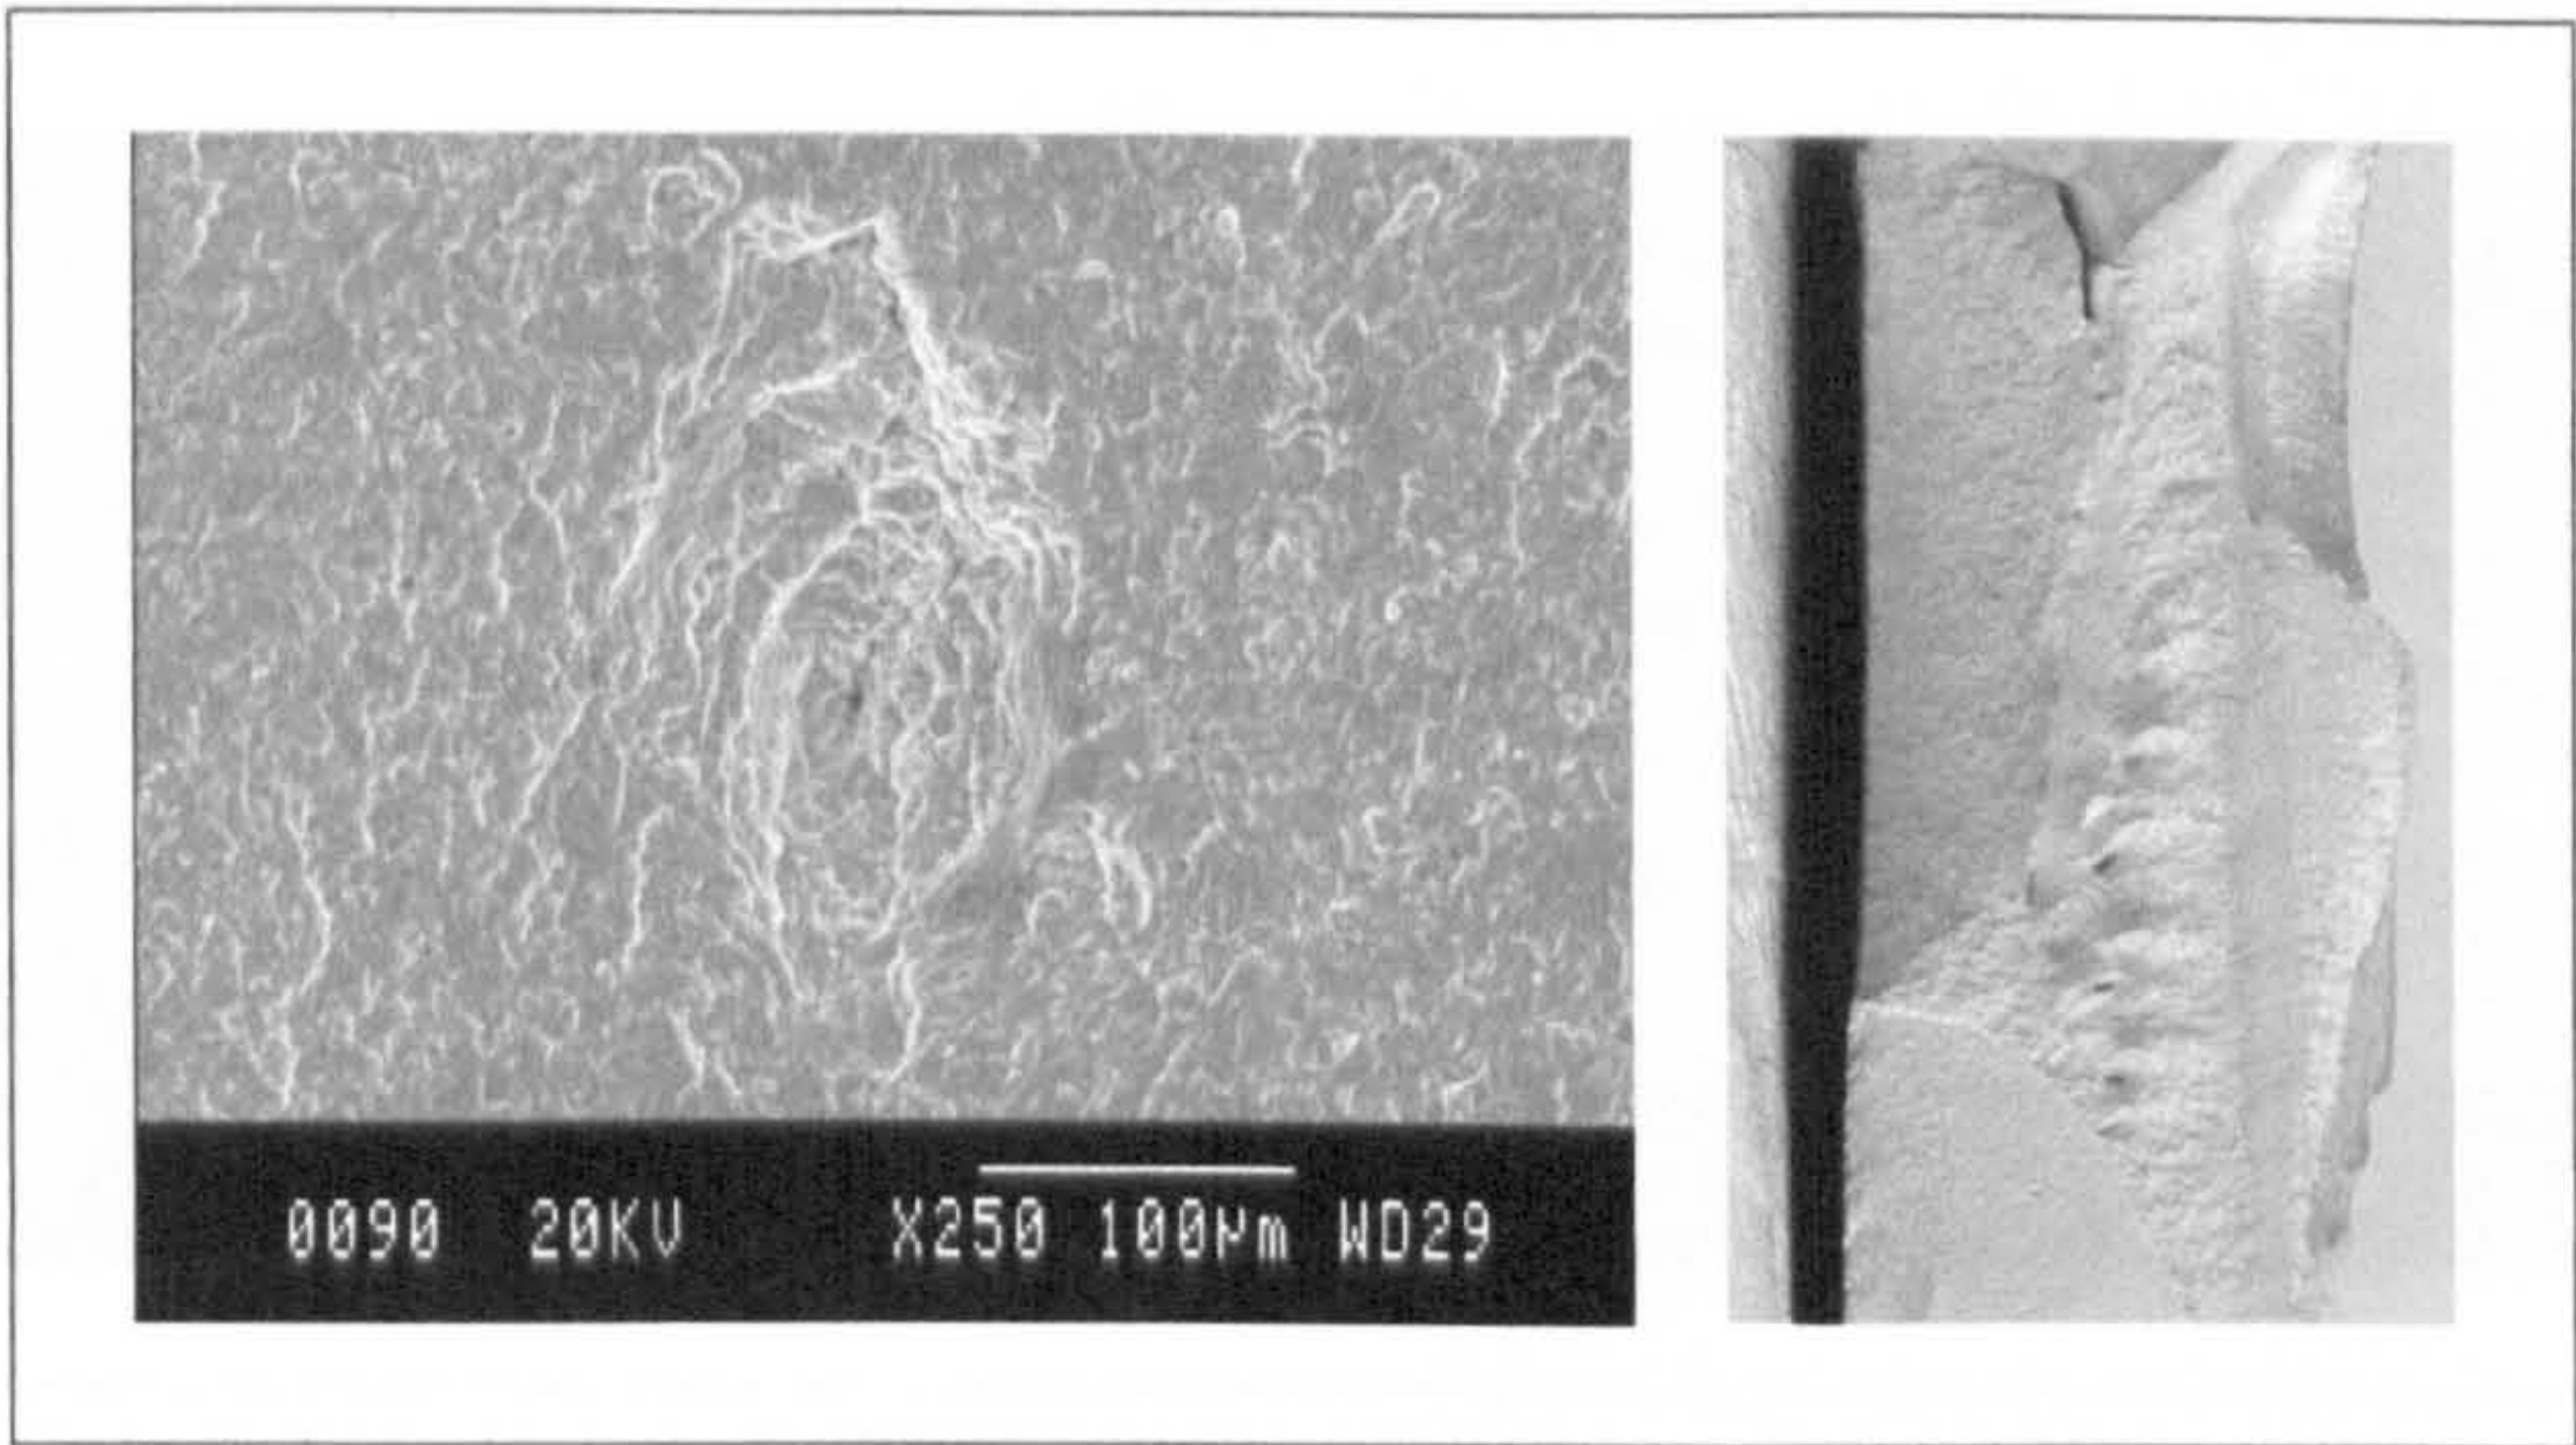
PFD on fatigue (left) and fast fracture (right) surfaces, (FS SP 7).
